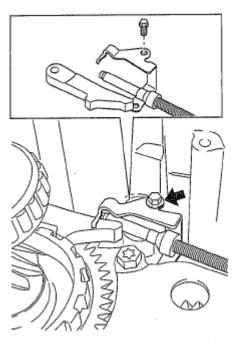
Locating Parking Rod Of Manual Valve Lever Courtesy of MAZDA MOTORS CORP.
